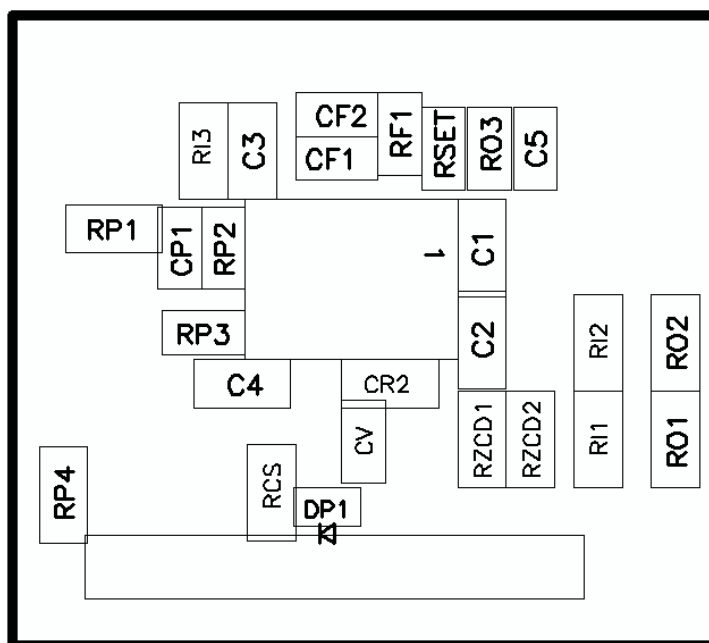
PR735 Controller Board Parts Placement (viewed from top)
